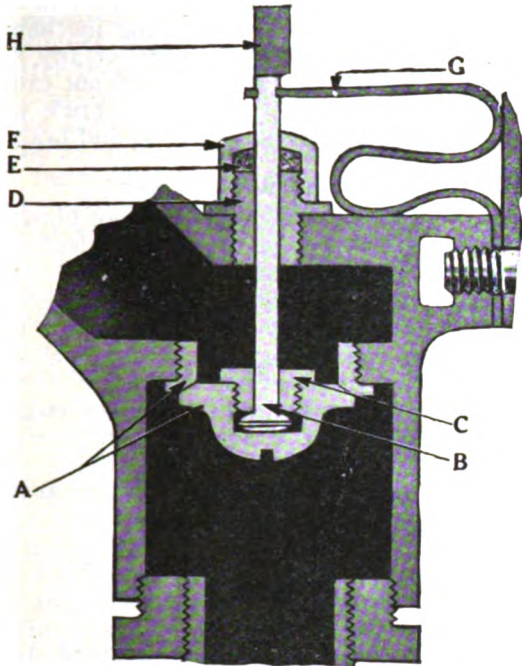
Cross section of valve. A—Monel metal seat and disc. B—Nickel steel stem. C—Nickel steel retaining nut. D—Brass valve stem guide. E—Packing. F—Nut. G—Spring. H—Trigger.
